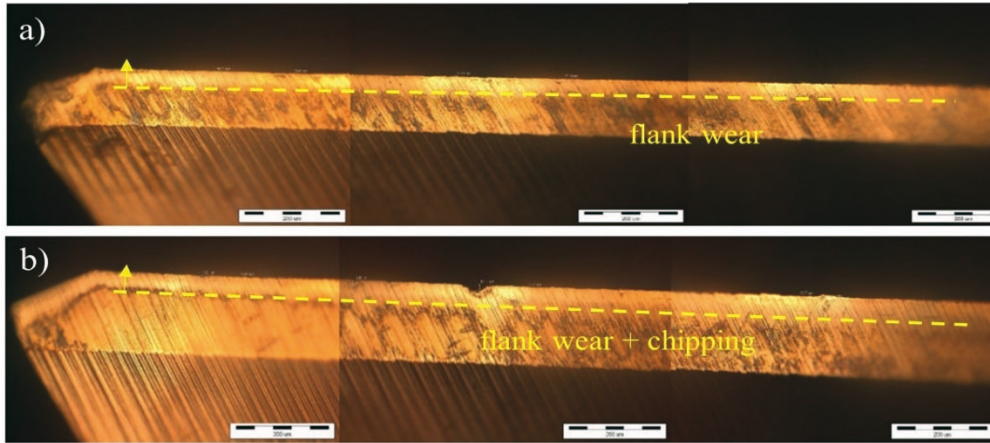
Flank condition of the cutting edges after cutting the SUJ2 workpiece material
